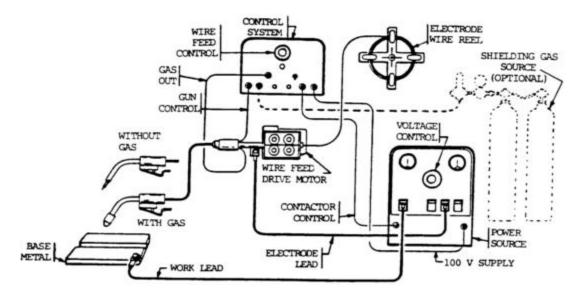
9 - Equipments of Flux Cored Welding. [I]
